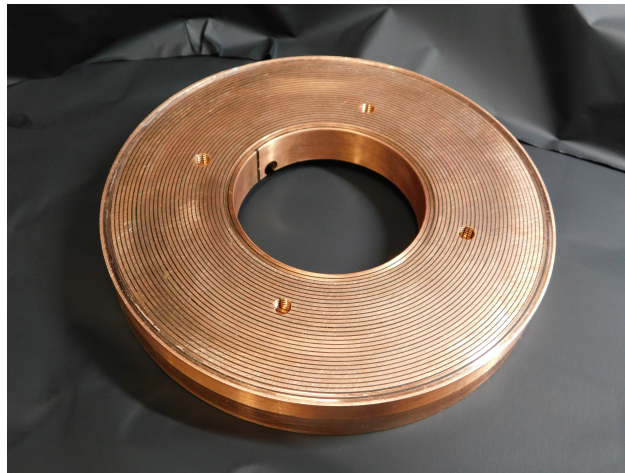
Bulk-machined electromagnet. Picture of the bulk-machined electromagnet after the last set of machining to provide a direct and clean copper interface on the top for direct water cooling. The threaded holes drilled in the coil accommodate M6 to M4 PEEK adaptors. This will be used to press the PEEK cap against the coil body, compressing the Orings placed in the ridges machined in the coil body on the inner and outer diameter.
